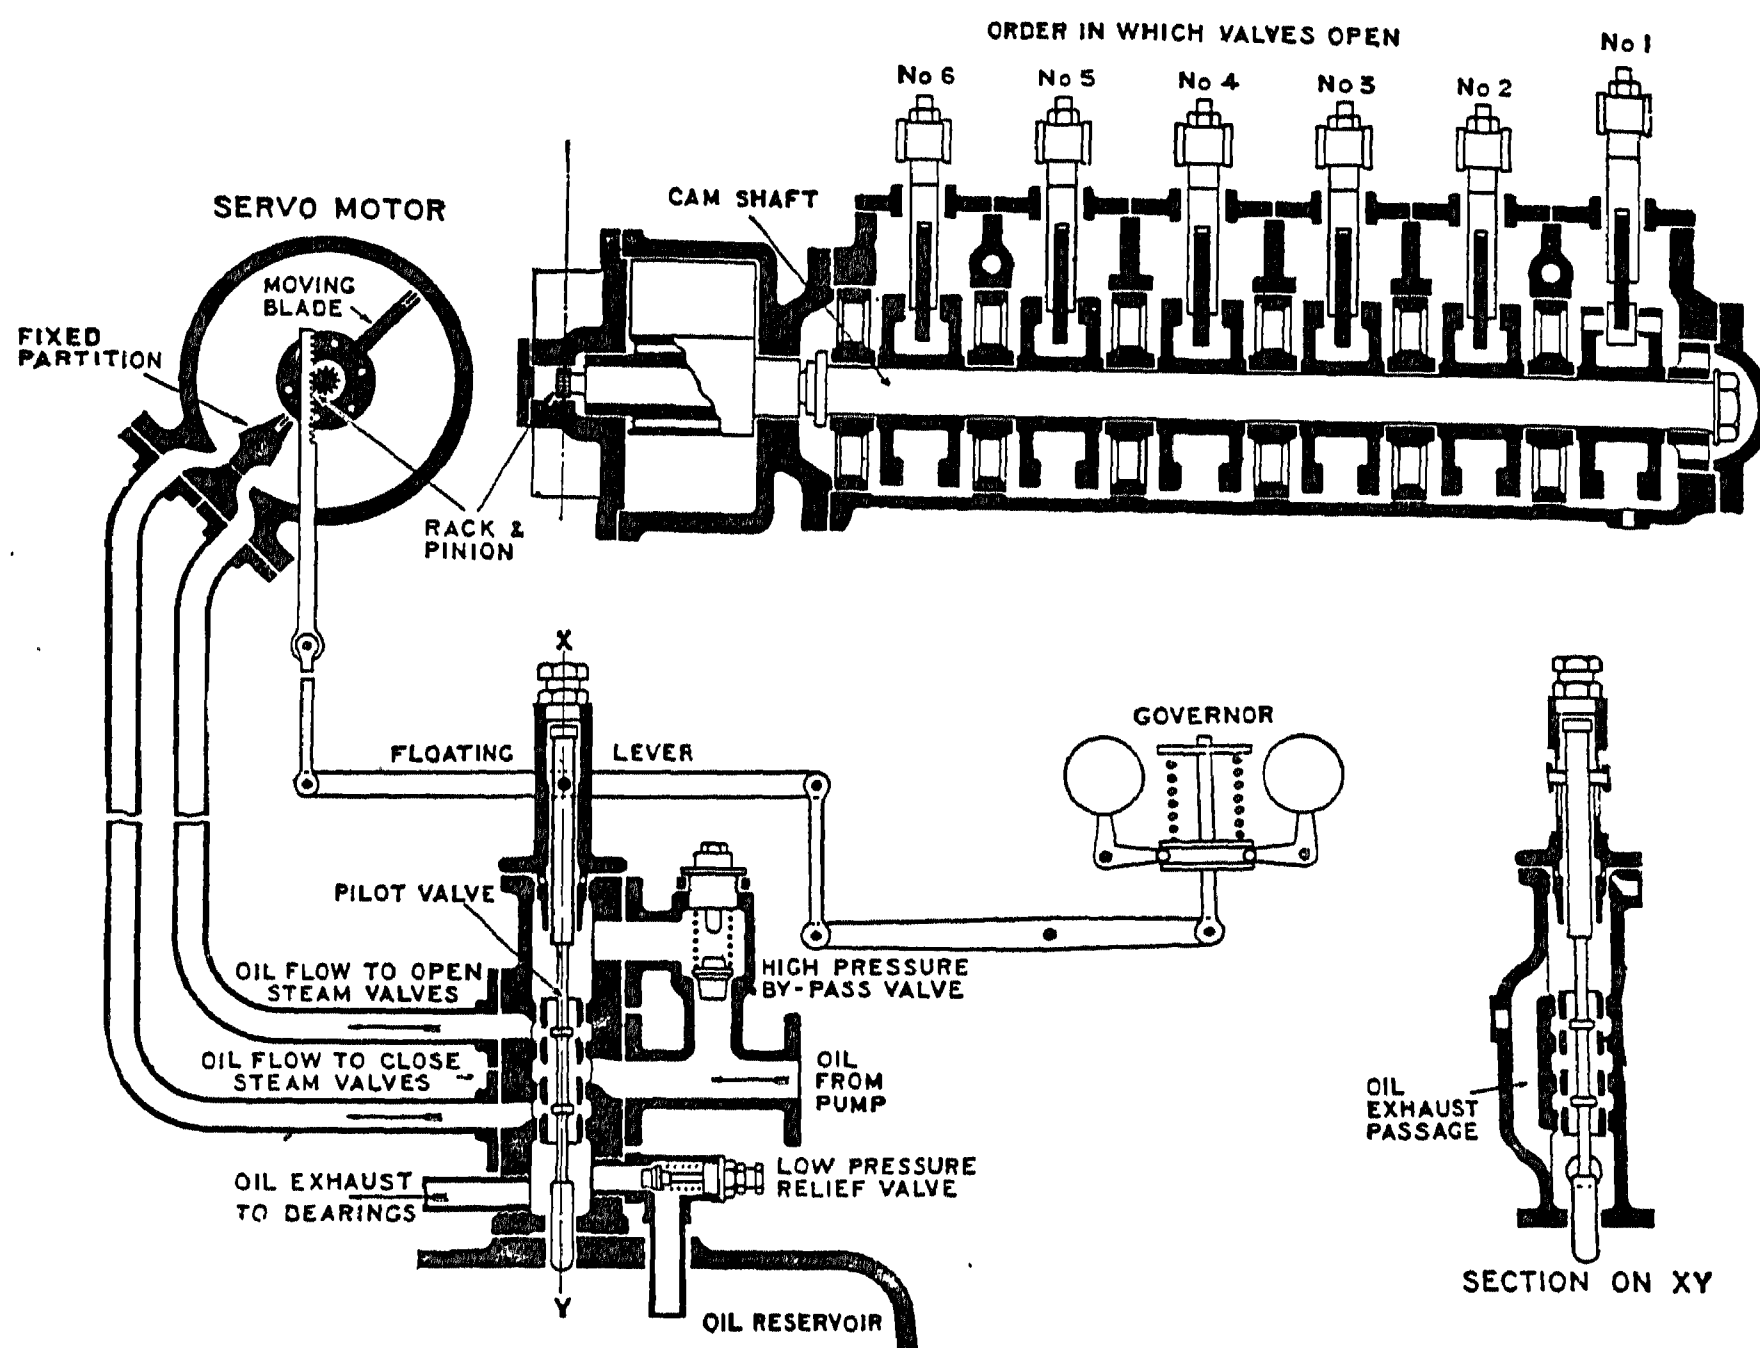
Governor and Nozzle Control Gear for Curtis Turbine
